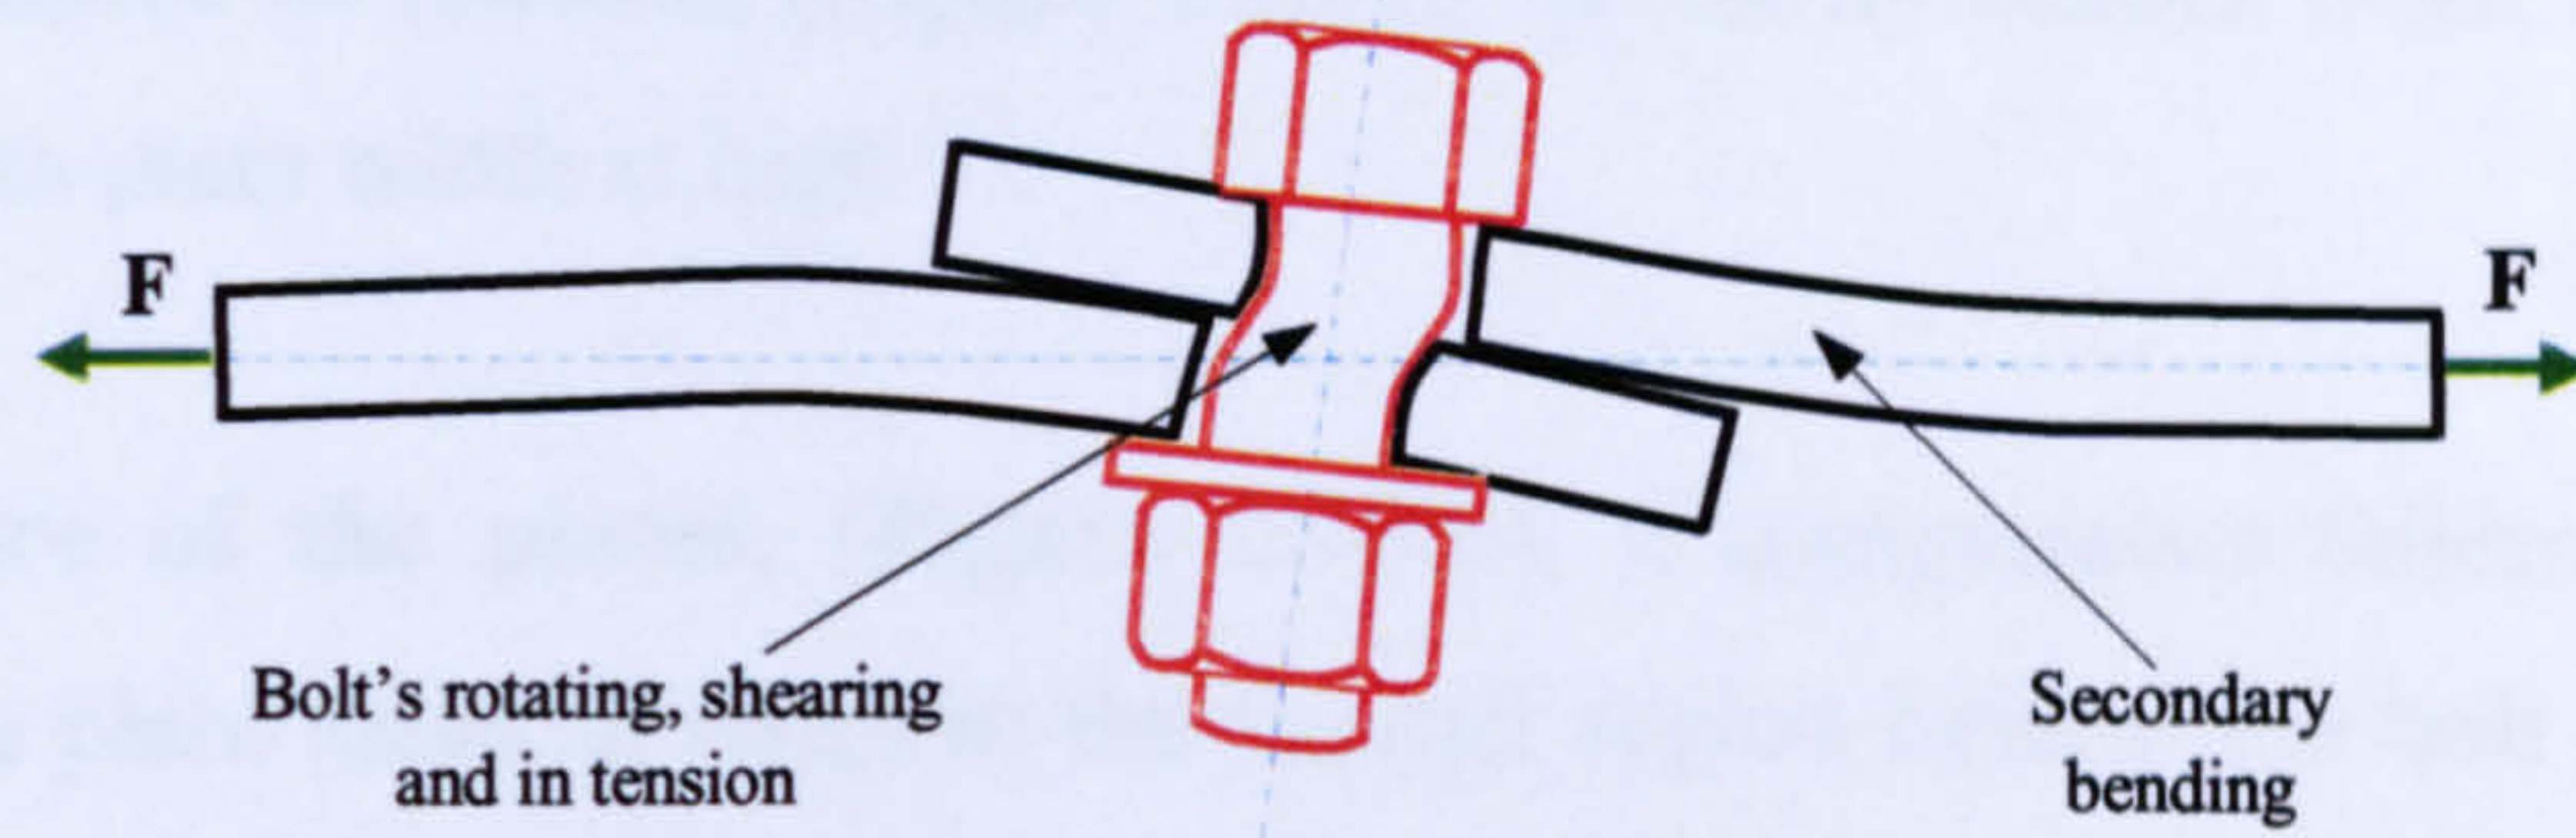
b Typical Deformation of Lap joint with a single bolt subjected to single shear
